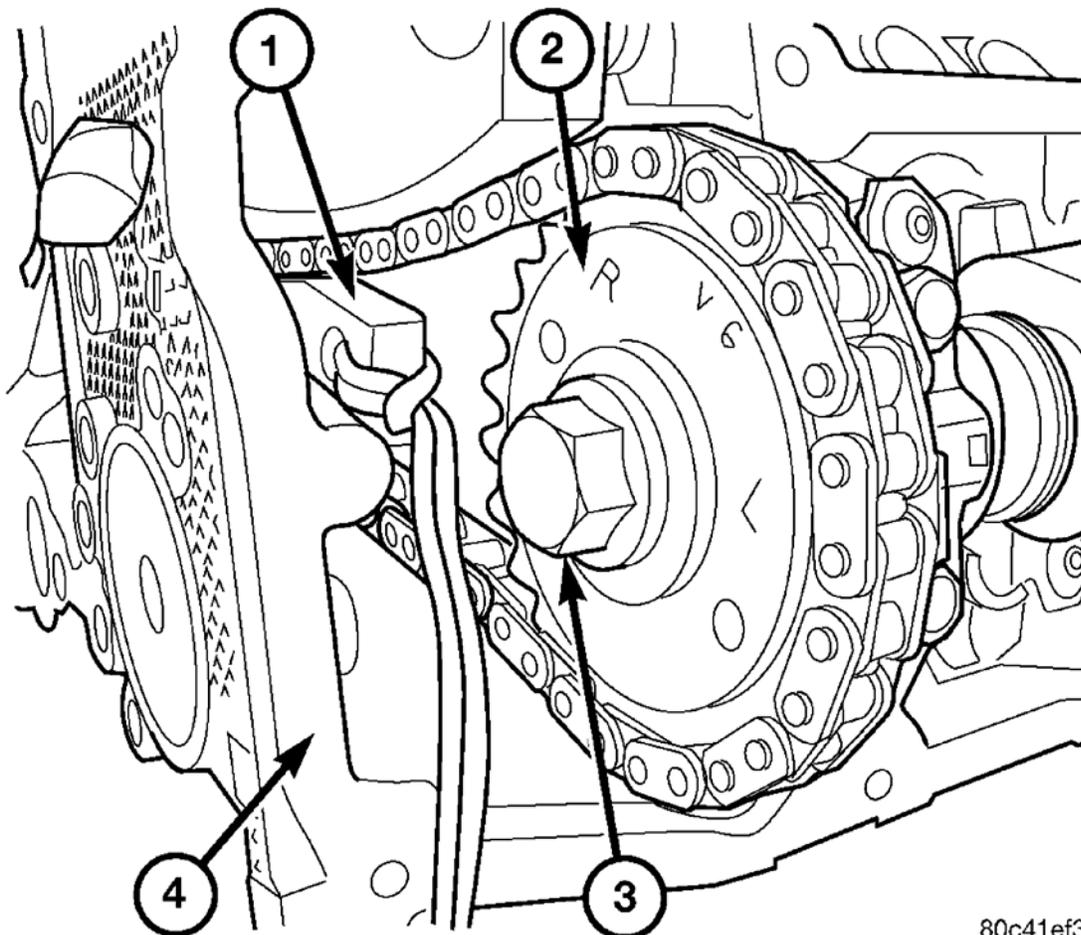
Identifying Special Tool 8379, Camshaft Sprocket, Camshaft Sprocket Bolt & Cylinder Head
